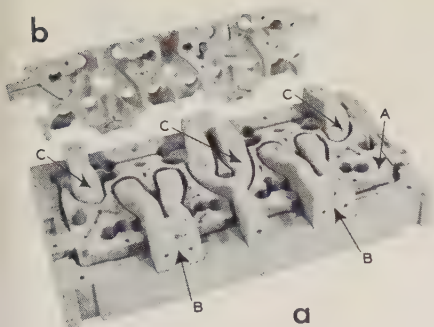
The most commonly used method of coring an overhead valve engine's cylinder head requires the formation of a core assembly which is built upon a large carrier core (a). Upon this carrier core the other cores are set and pasted for location and support. In this view the upper half of the water-jacket core (b) is ready to be pasted and nailed in position to the lower half of the water-jacket core (A). This assembly will then require further baking to dry the paste and form a unitized water-jacket core surrounding the intake-passage (B) and exhaust-passage (C) cores.
